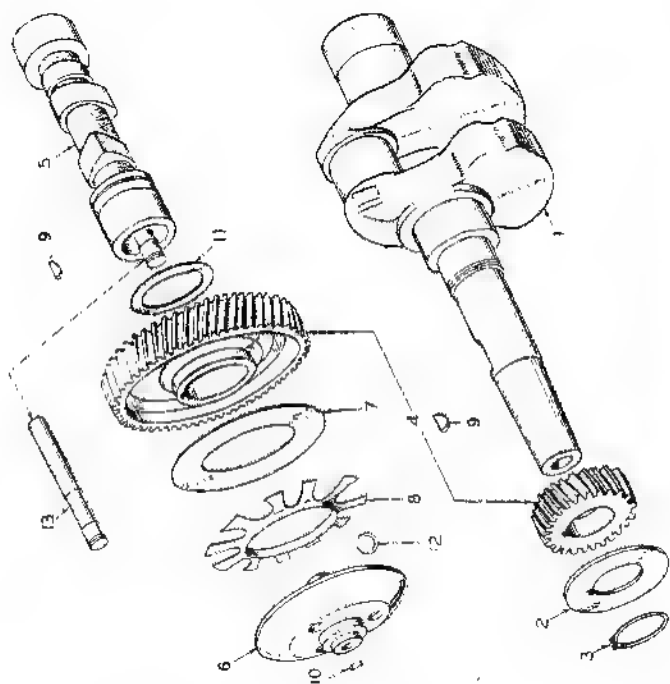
CRANKSHAFT, CAMSHAFT AND GOVERNOR CUP GROUP
